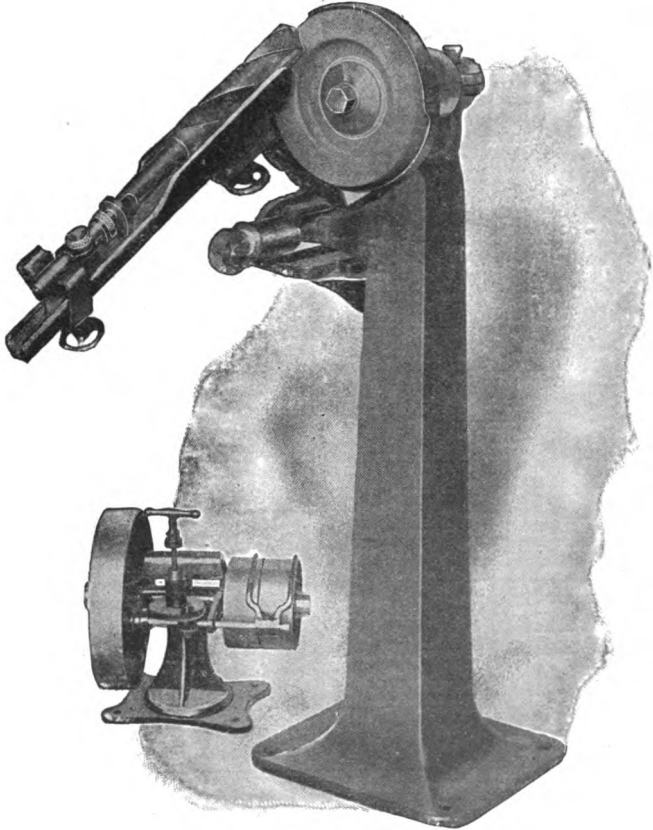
New Yankee Twist Drill Grinder. Messrs Buck & Hickman.
